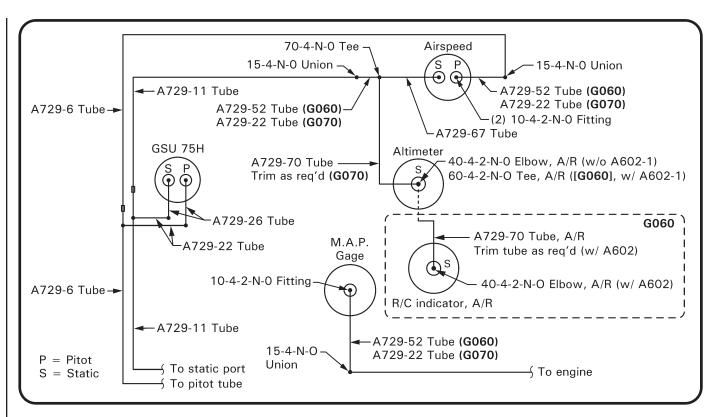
GARMIN G500H UPPER CONSOLE PITOT-STATIC SCHEMATIC (STD)
